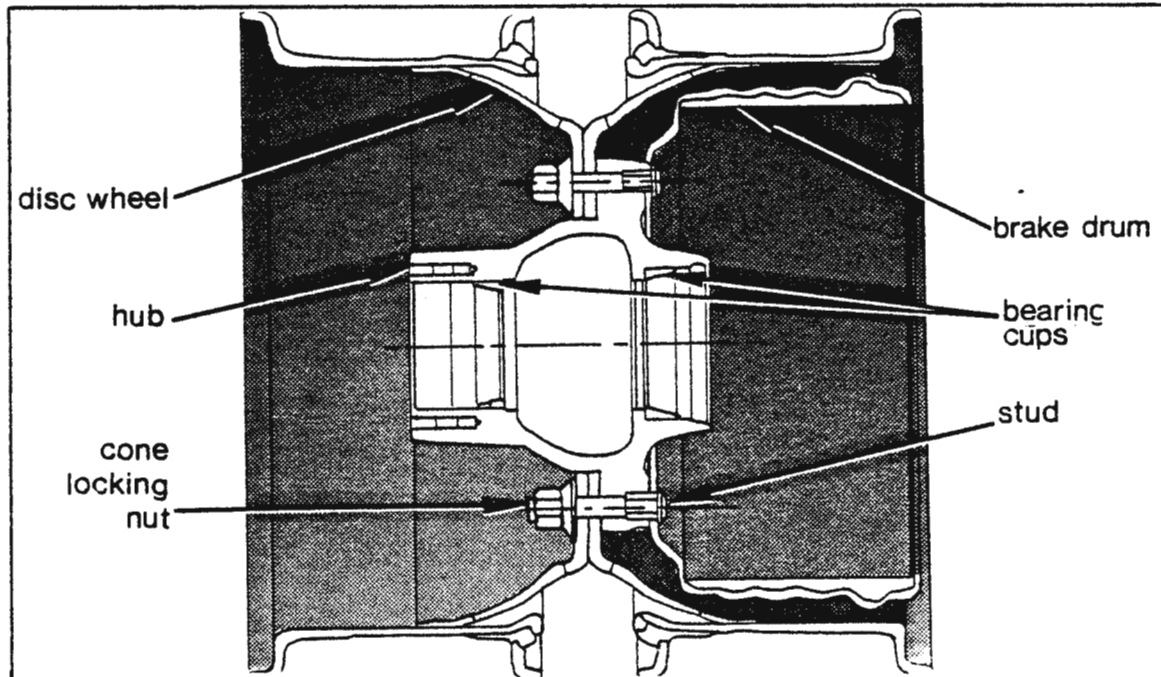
Dual Disc Wheels, Three-Piece Lock Rim with Cone Nut Securement
